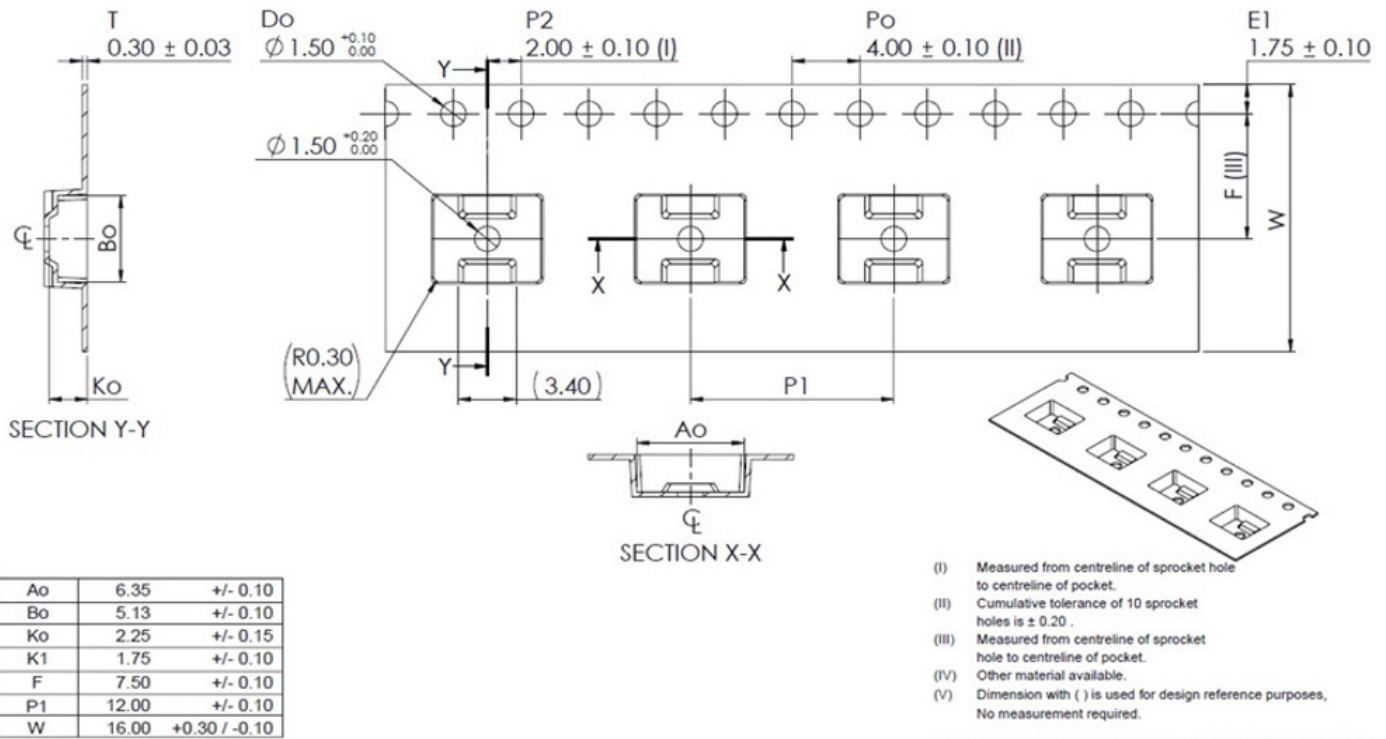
Tape and Pocket Drawing for SOIC-8 Package
